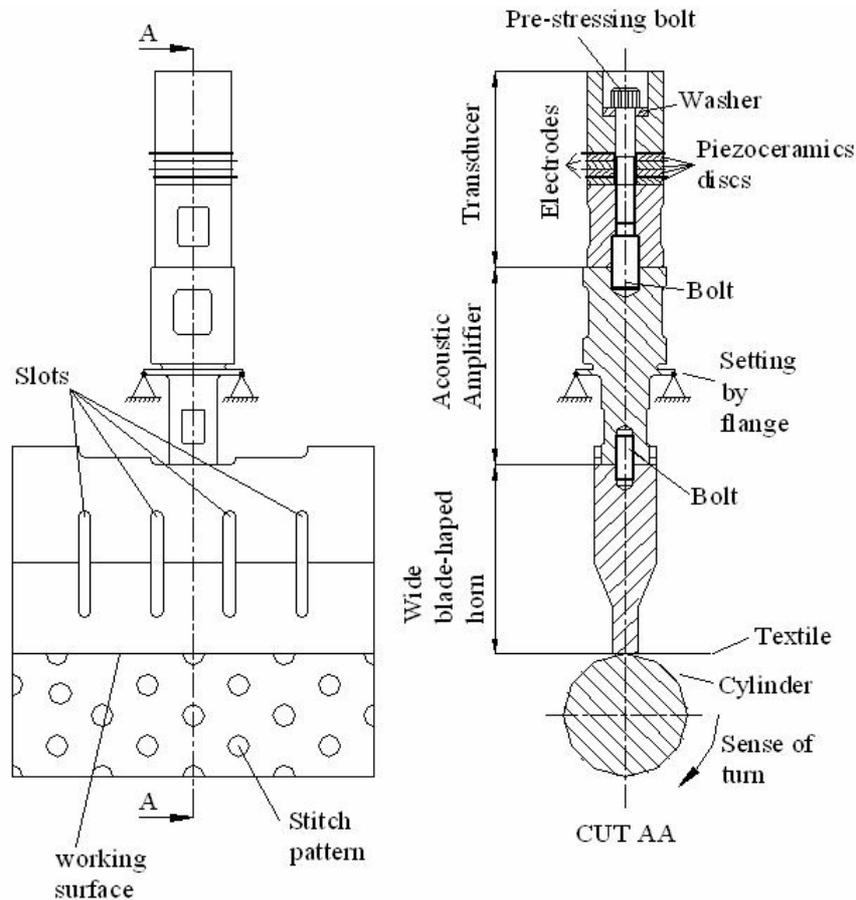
Schematic representation of the assembly of ultrasonic cutting and welding of thermoplastic textile.
